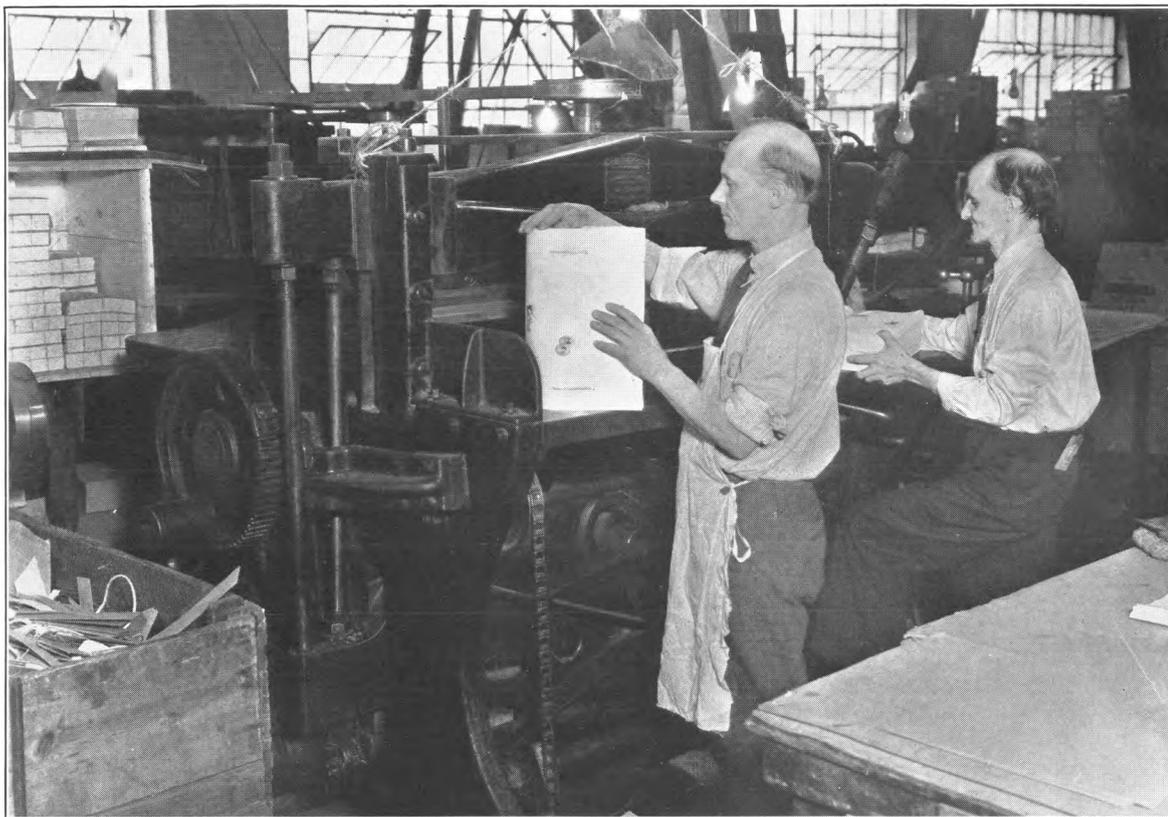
CUTTING SHEETS TO SIZE ON A GUILLOTINE CUTTING MACHINE.
